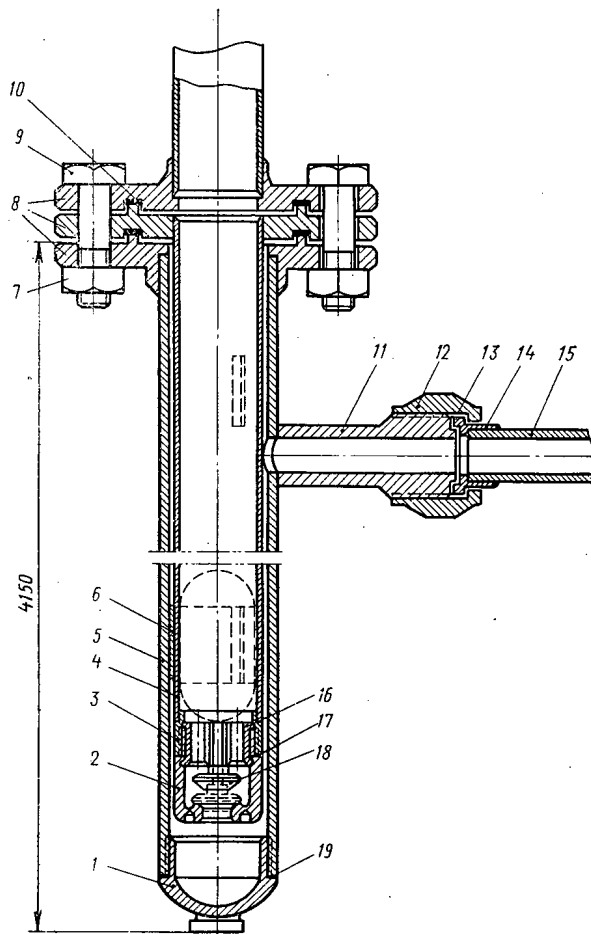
Irradiation channel: 1) bottom; 2, 3) inserts; 4) channel inner tube; 5) channel body; 6) distance spacer; 7) nut; 8) flange; 9) bolt; 10, 13, 17, 19) washers; 11) pipe connection; 12) union nut; 14) pipe connector; 15) pipe; 16) travel stop; 18) valve.
